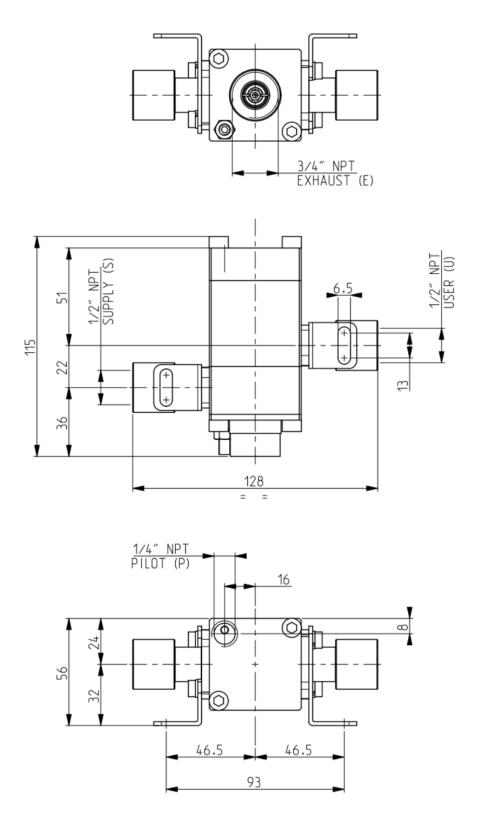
Dimensional drawing BR-08SSH01 / BR-08SSS01 / BR-08SSL01
